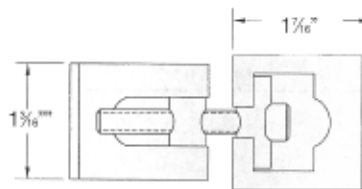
Fig. N: Quick Release Barrel Nut Assembly with 1/4-20 bolt.
